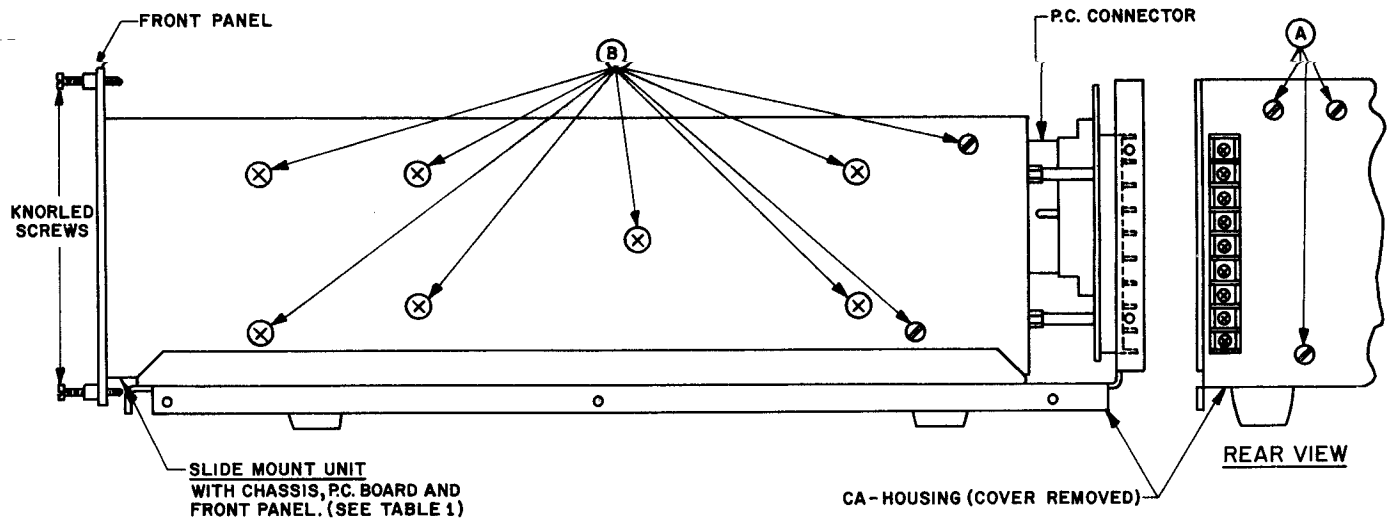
INSTALLATION AND ALIGNMENT OF PLUG-IN MODULES INTO THE CA-HOUSING.
